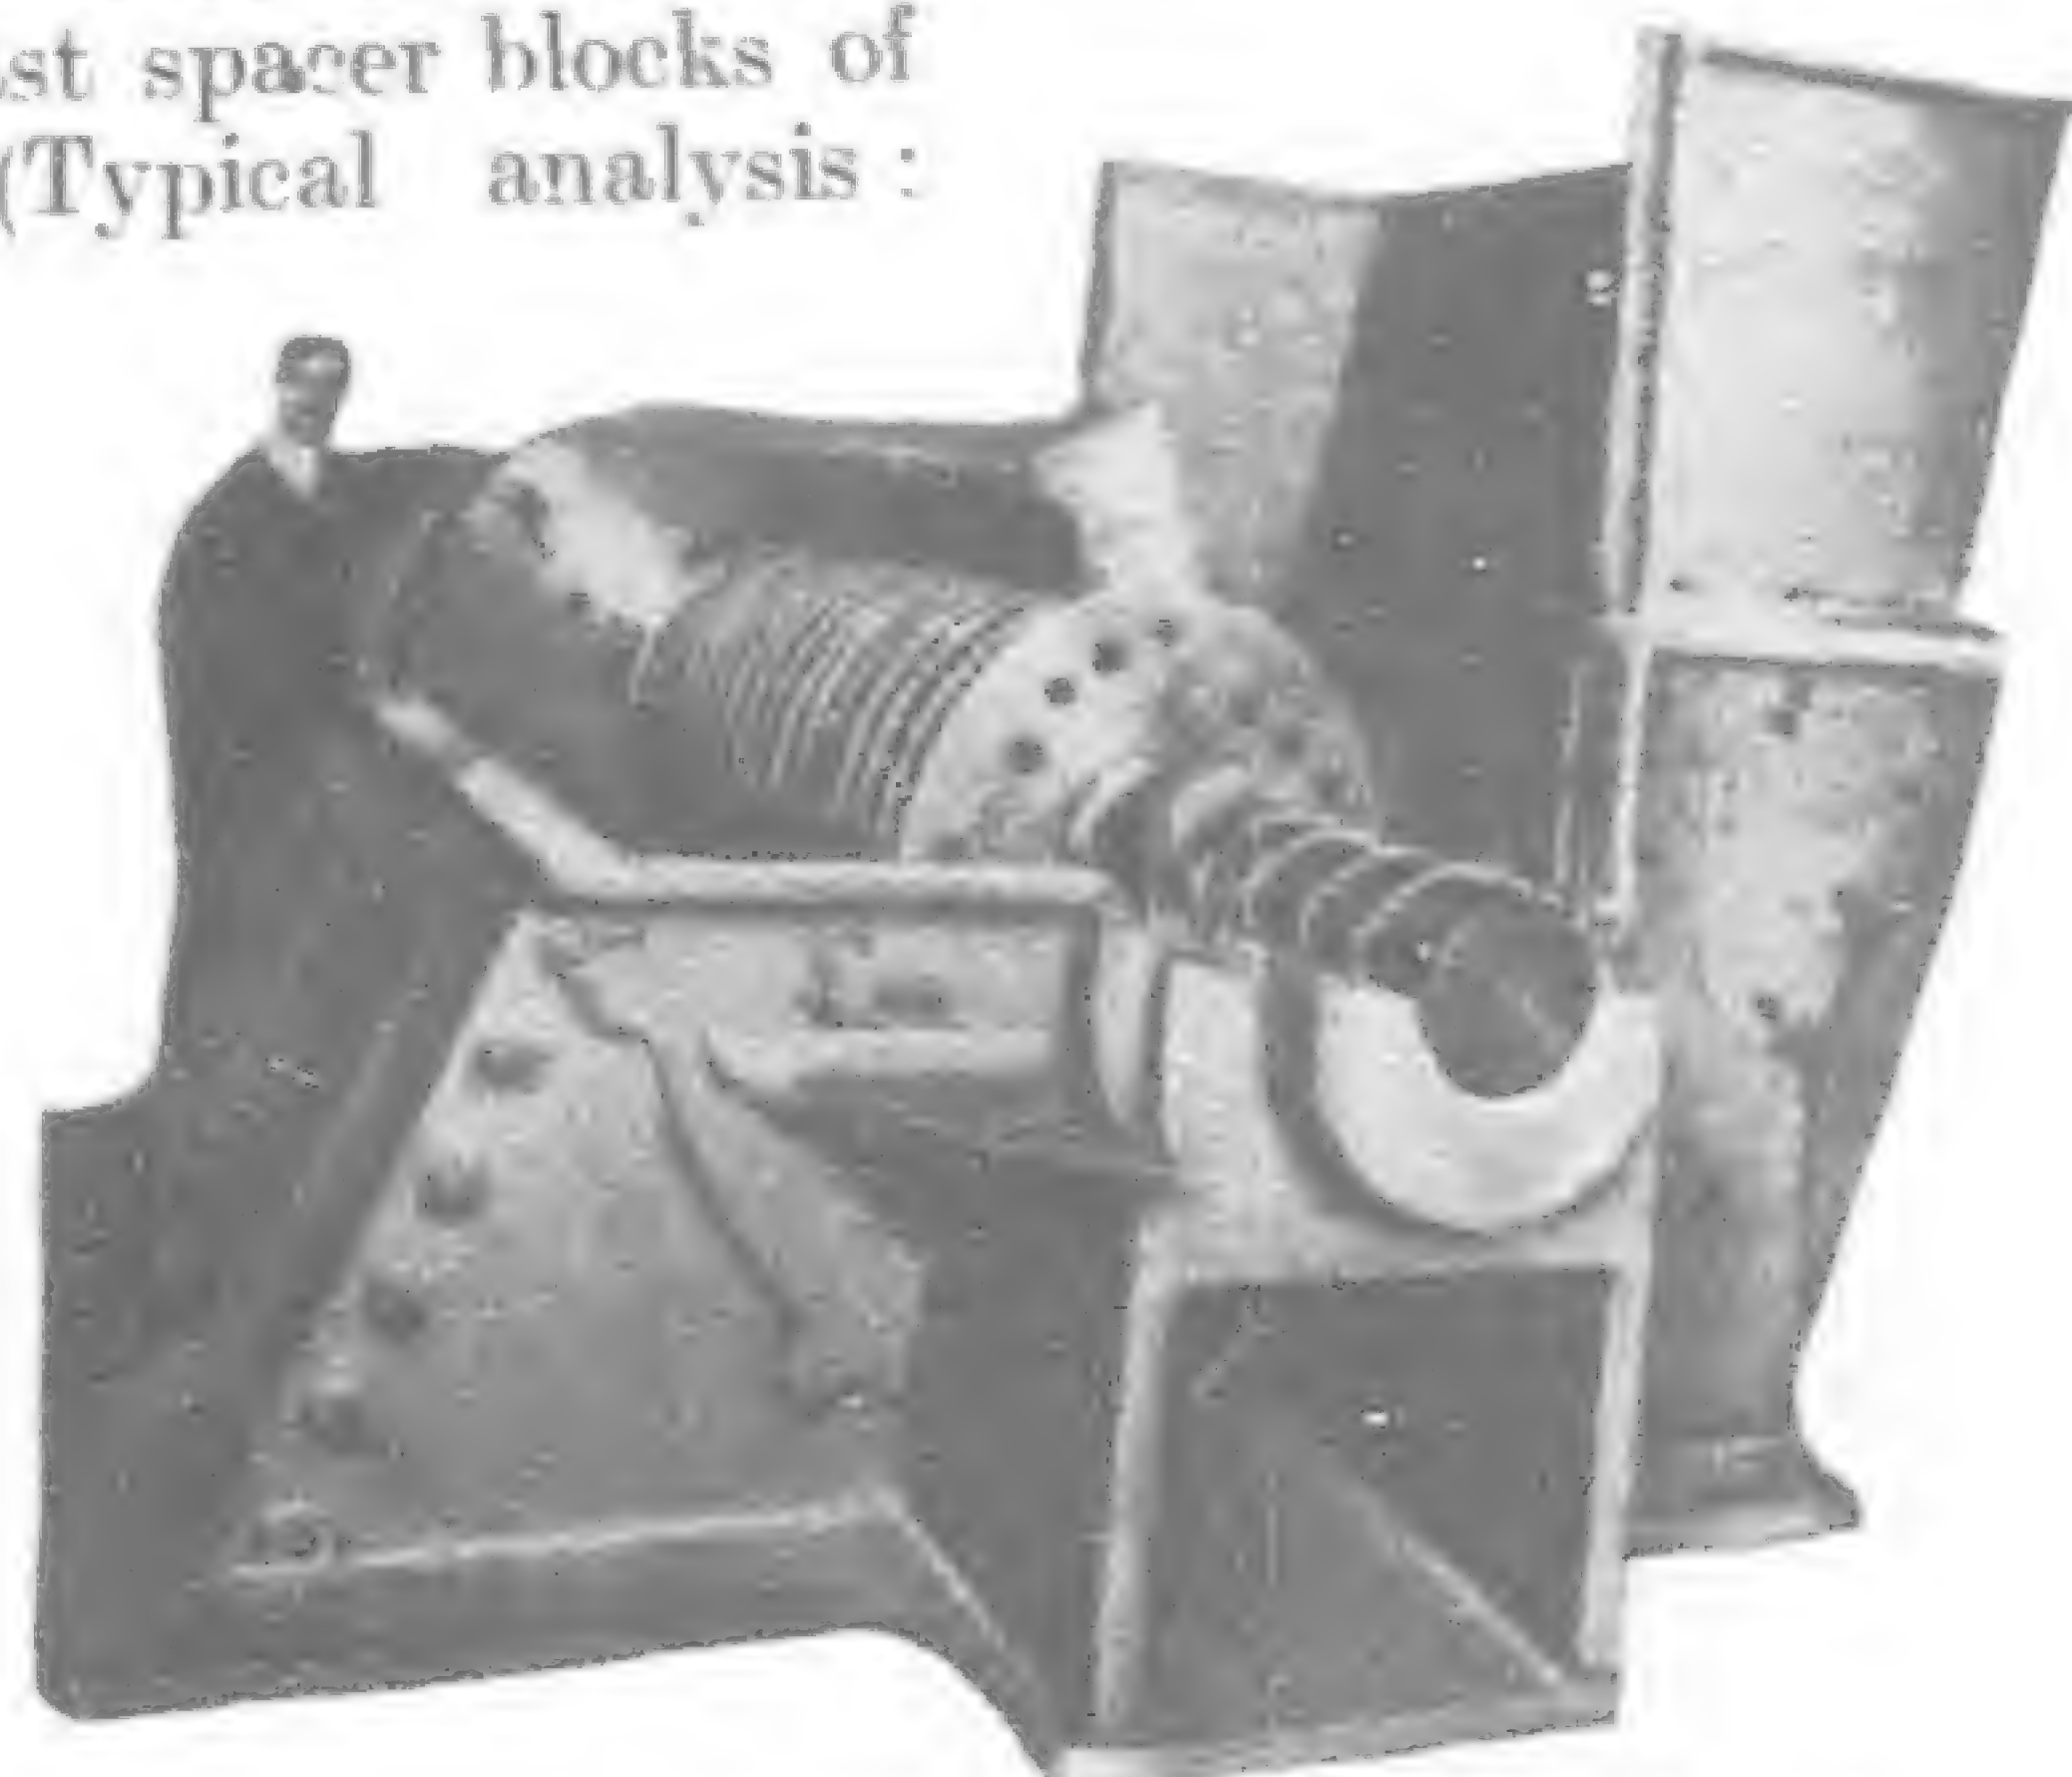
"Mammoth" Crusher showing Main Shaft forged from Nickel Steel
